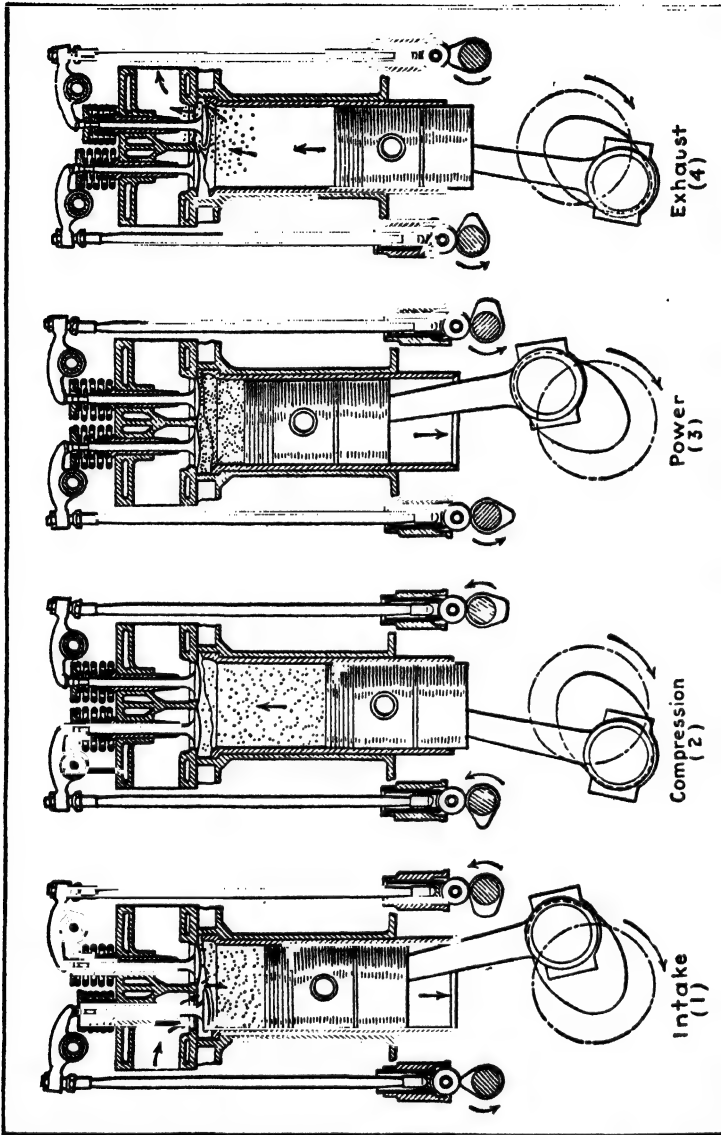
Diagram Showing Sequence of Cycles in an Internal-Combustion Engine. Gas Entering on the Intake Stroke 1, is Compressed on the Next Upward Stroke of the Piston 2, is Exploded at the End of Compression Stroke 3, and Drives the Piston Down, Imparting Power to the Crankshaft, as at 4. The Gases are then Expelled from Cylinder by the Return Movement of Piston Through the Open Exhaust Valve, Opened by the Cam Actuated Mechanism.
